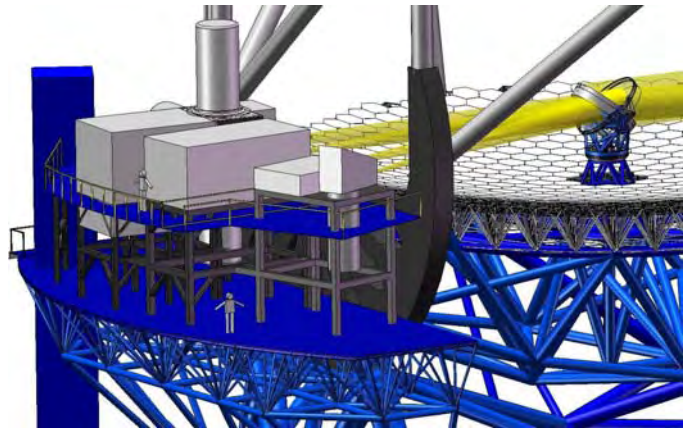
Conceptual layout of access infrastructure for the final instrument locations.
